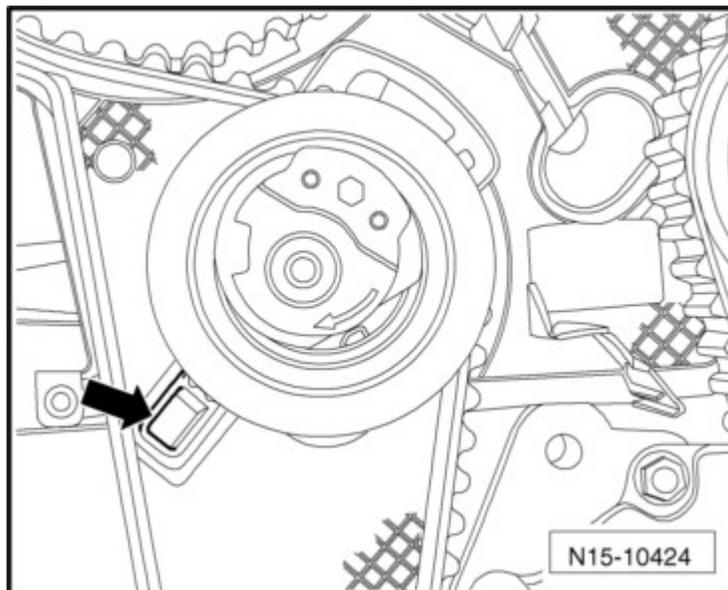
Identifying Tensioner Positioned In Rear Toothed Belt Guard -Arrow-
